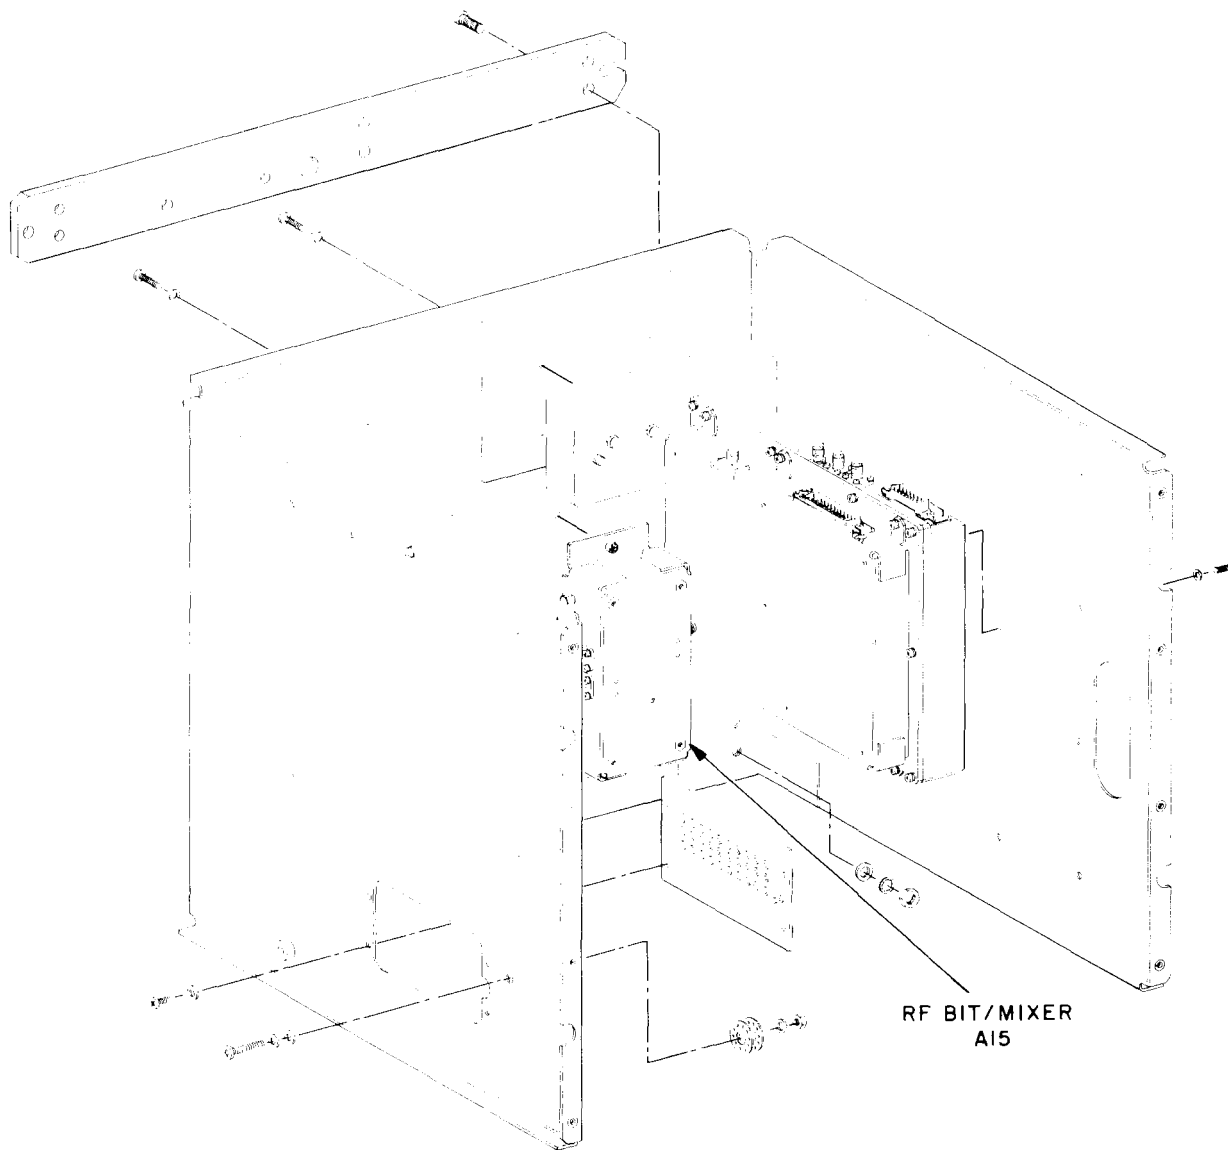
Test set RF BIT/mixer assembly (exploded view)
